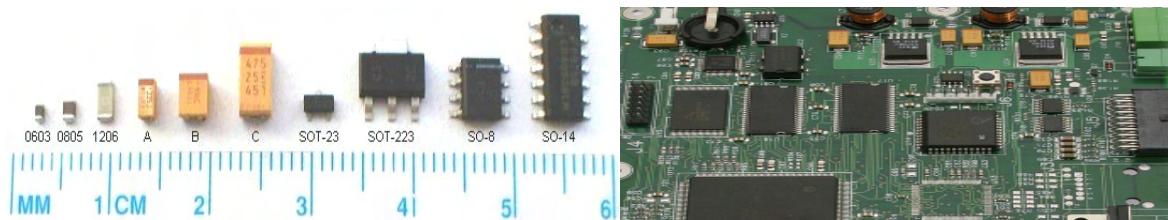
SURFACE MOUNT DEVICES & PCB BOARD
